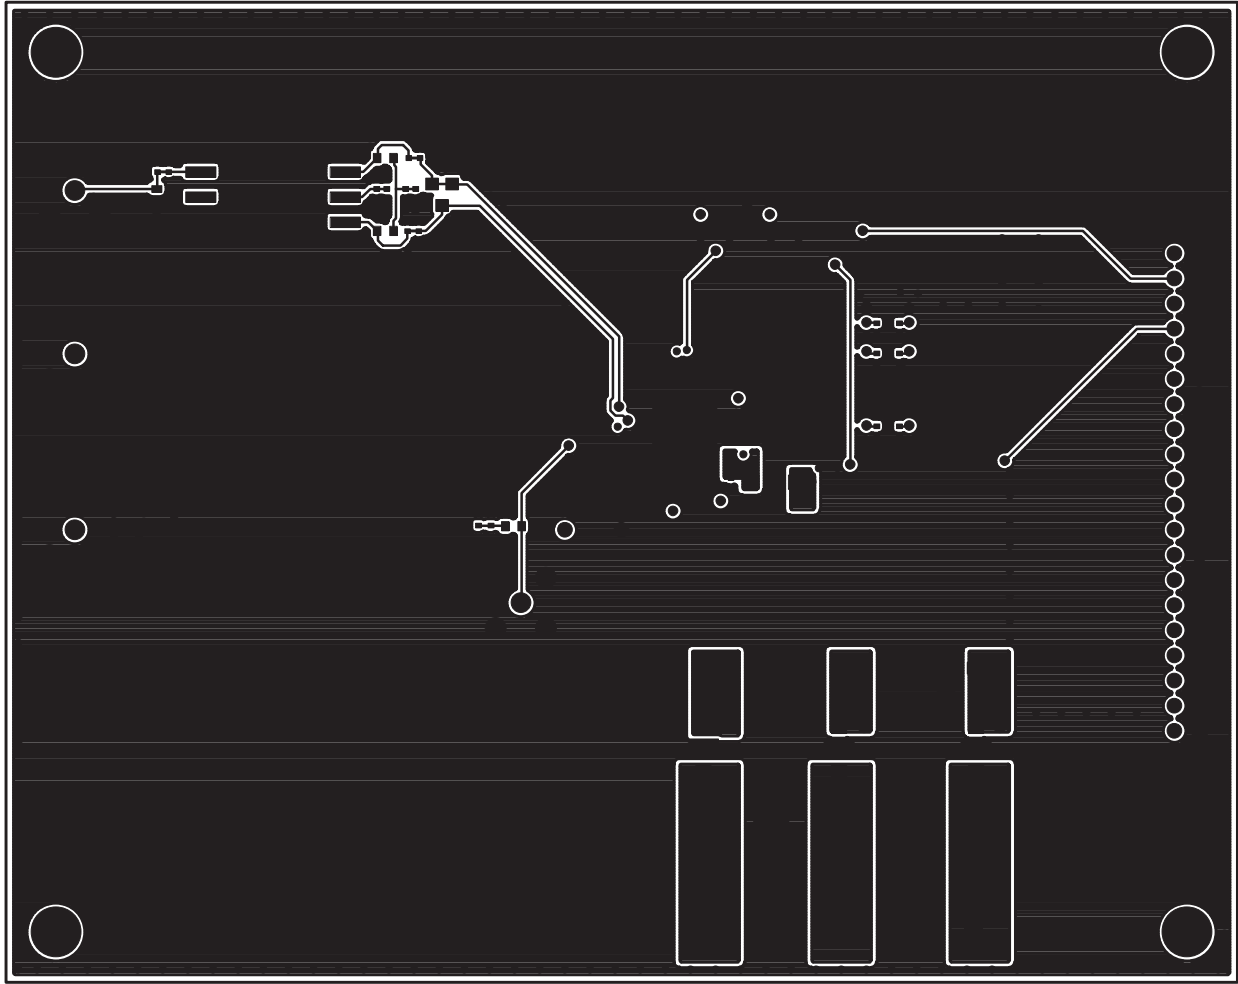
MAX1427 EV Kit PC Board Layout—Solder Side
